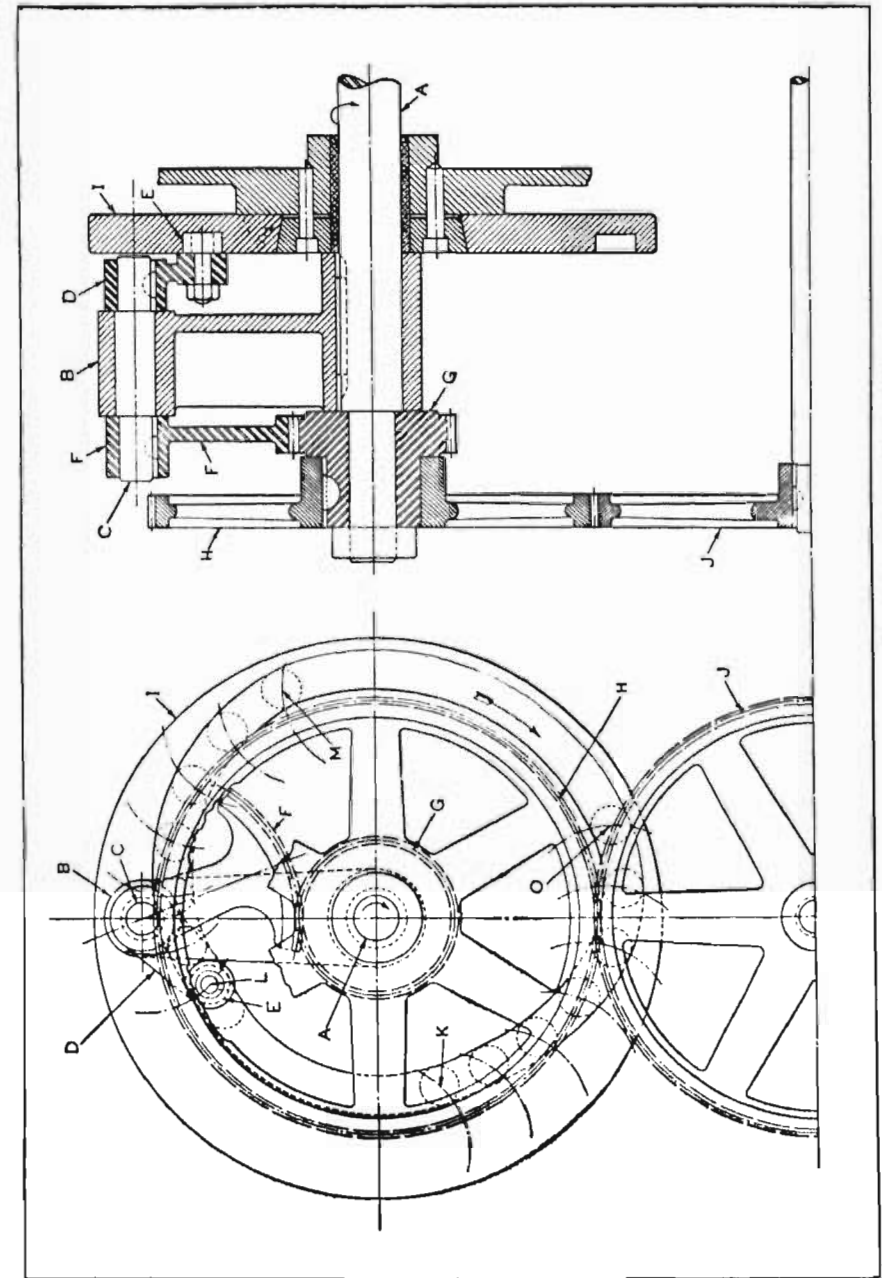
Rotation of Shaft A at Constant Speed Imparts Intermittent Motion to Gear J.
